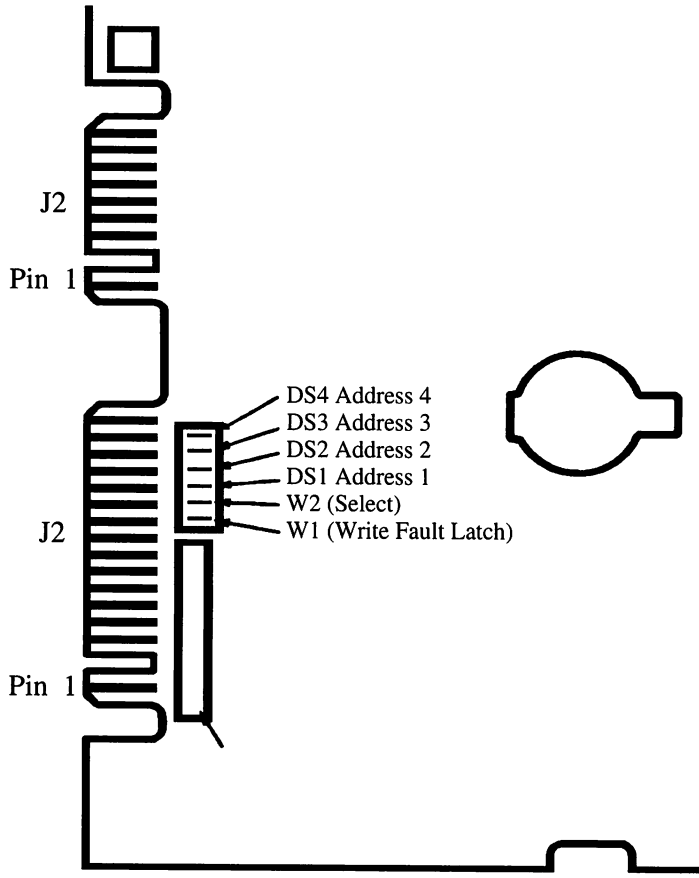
Drive Jumper Options (PCB P/N 1014150)
